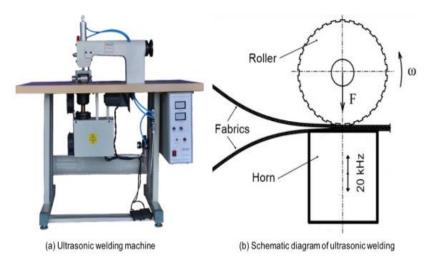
Ultrasonic welding equipment and schematic diagram. (a) Ultrasonic welding machine, (b) Schematic diagram of ultrasonic welding (Nguyen et al., 2020).
